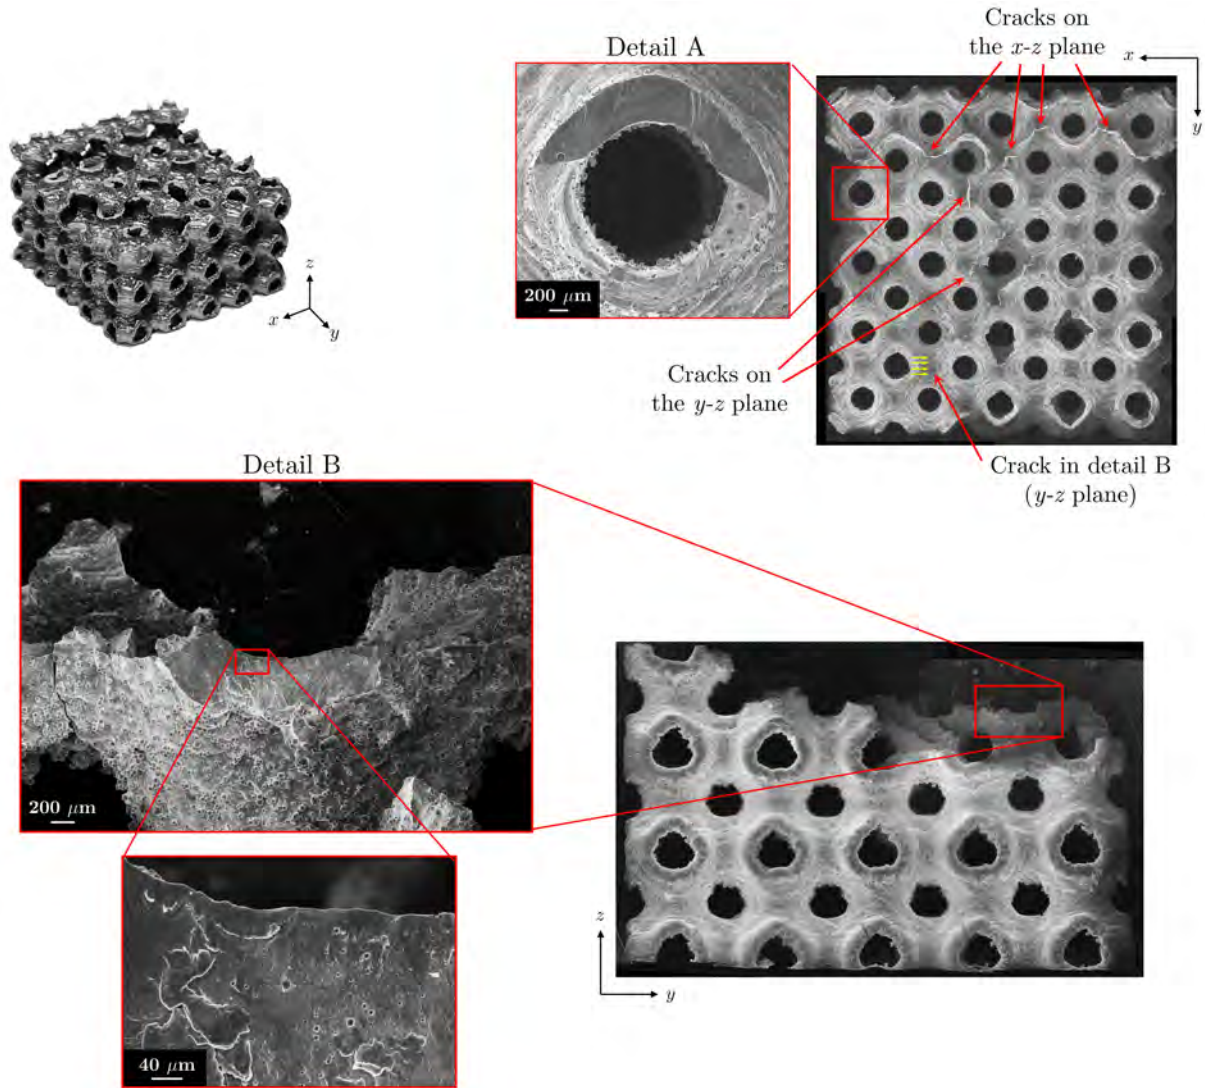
Fracture surface analysis of test CA29, tested at $R=-\infty$: 3-dimensional picture, top view and lateral view
